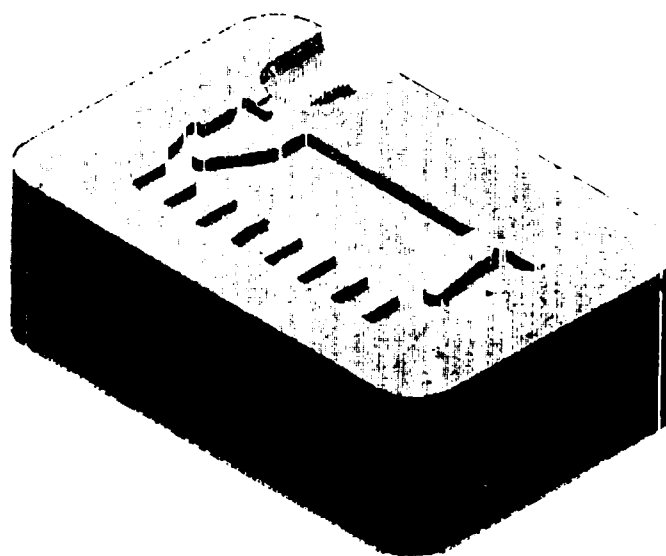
CAD Rendering of an Injection Molding Tooling Insert.
